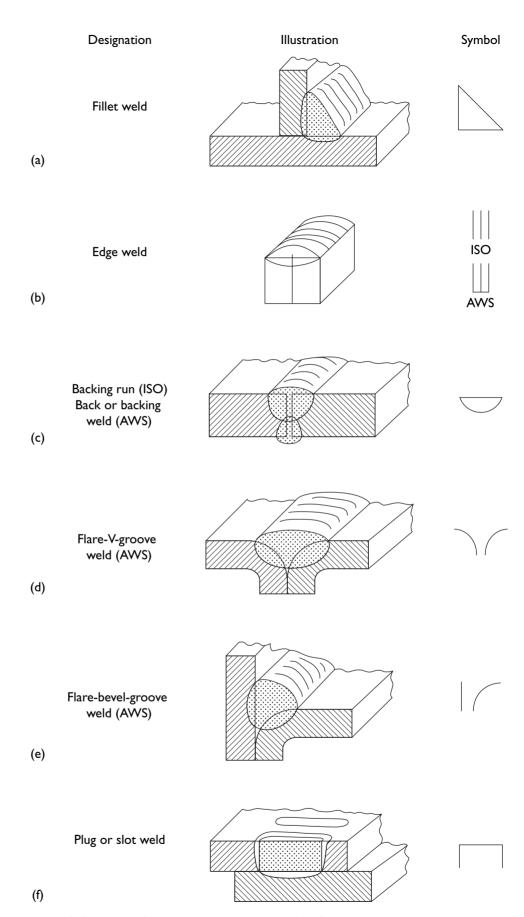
(a) illustrates a fillet weld. Unless otherwise indicated, the leg lengths are normally equal.
